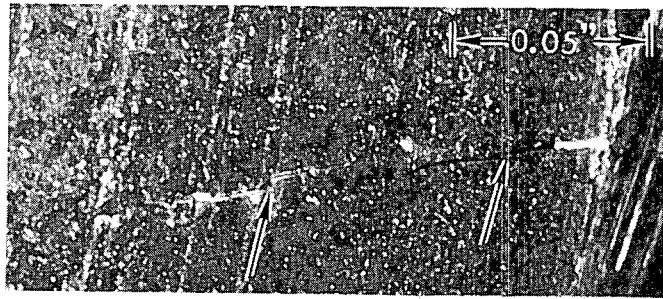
Taylor absolute pressure transducer 14 showing large crack (see arrows in enlargements of cracked areas) extending from edge of weld nugget to flat surface of bottom flange.
